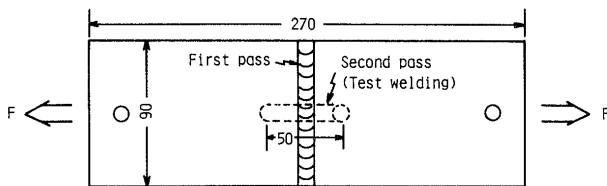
Specimen configuration used for the Cross-bead tensile hot cracking test coupled with the MISO technique.
